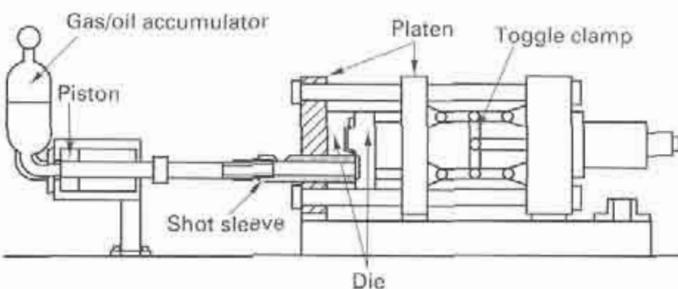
Principal components of a cold-chamber die-casting machine. (Adapted from Metals Handbook, 9th ed., Vol 15, p. 287, ASM International, Metals Park, OH.)
